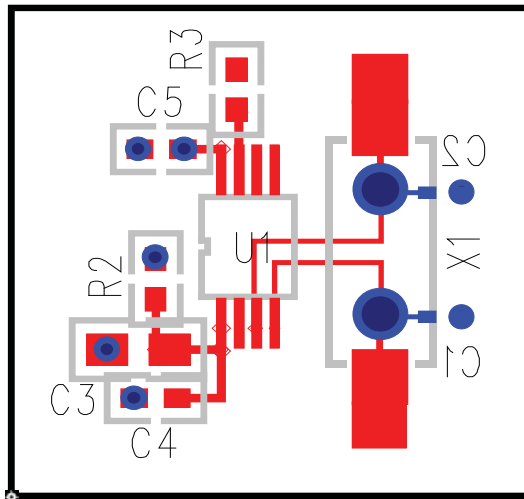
B. 840011 PC BOARD LAYOUT EXAMPLE
